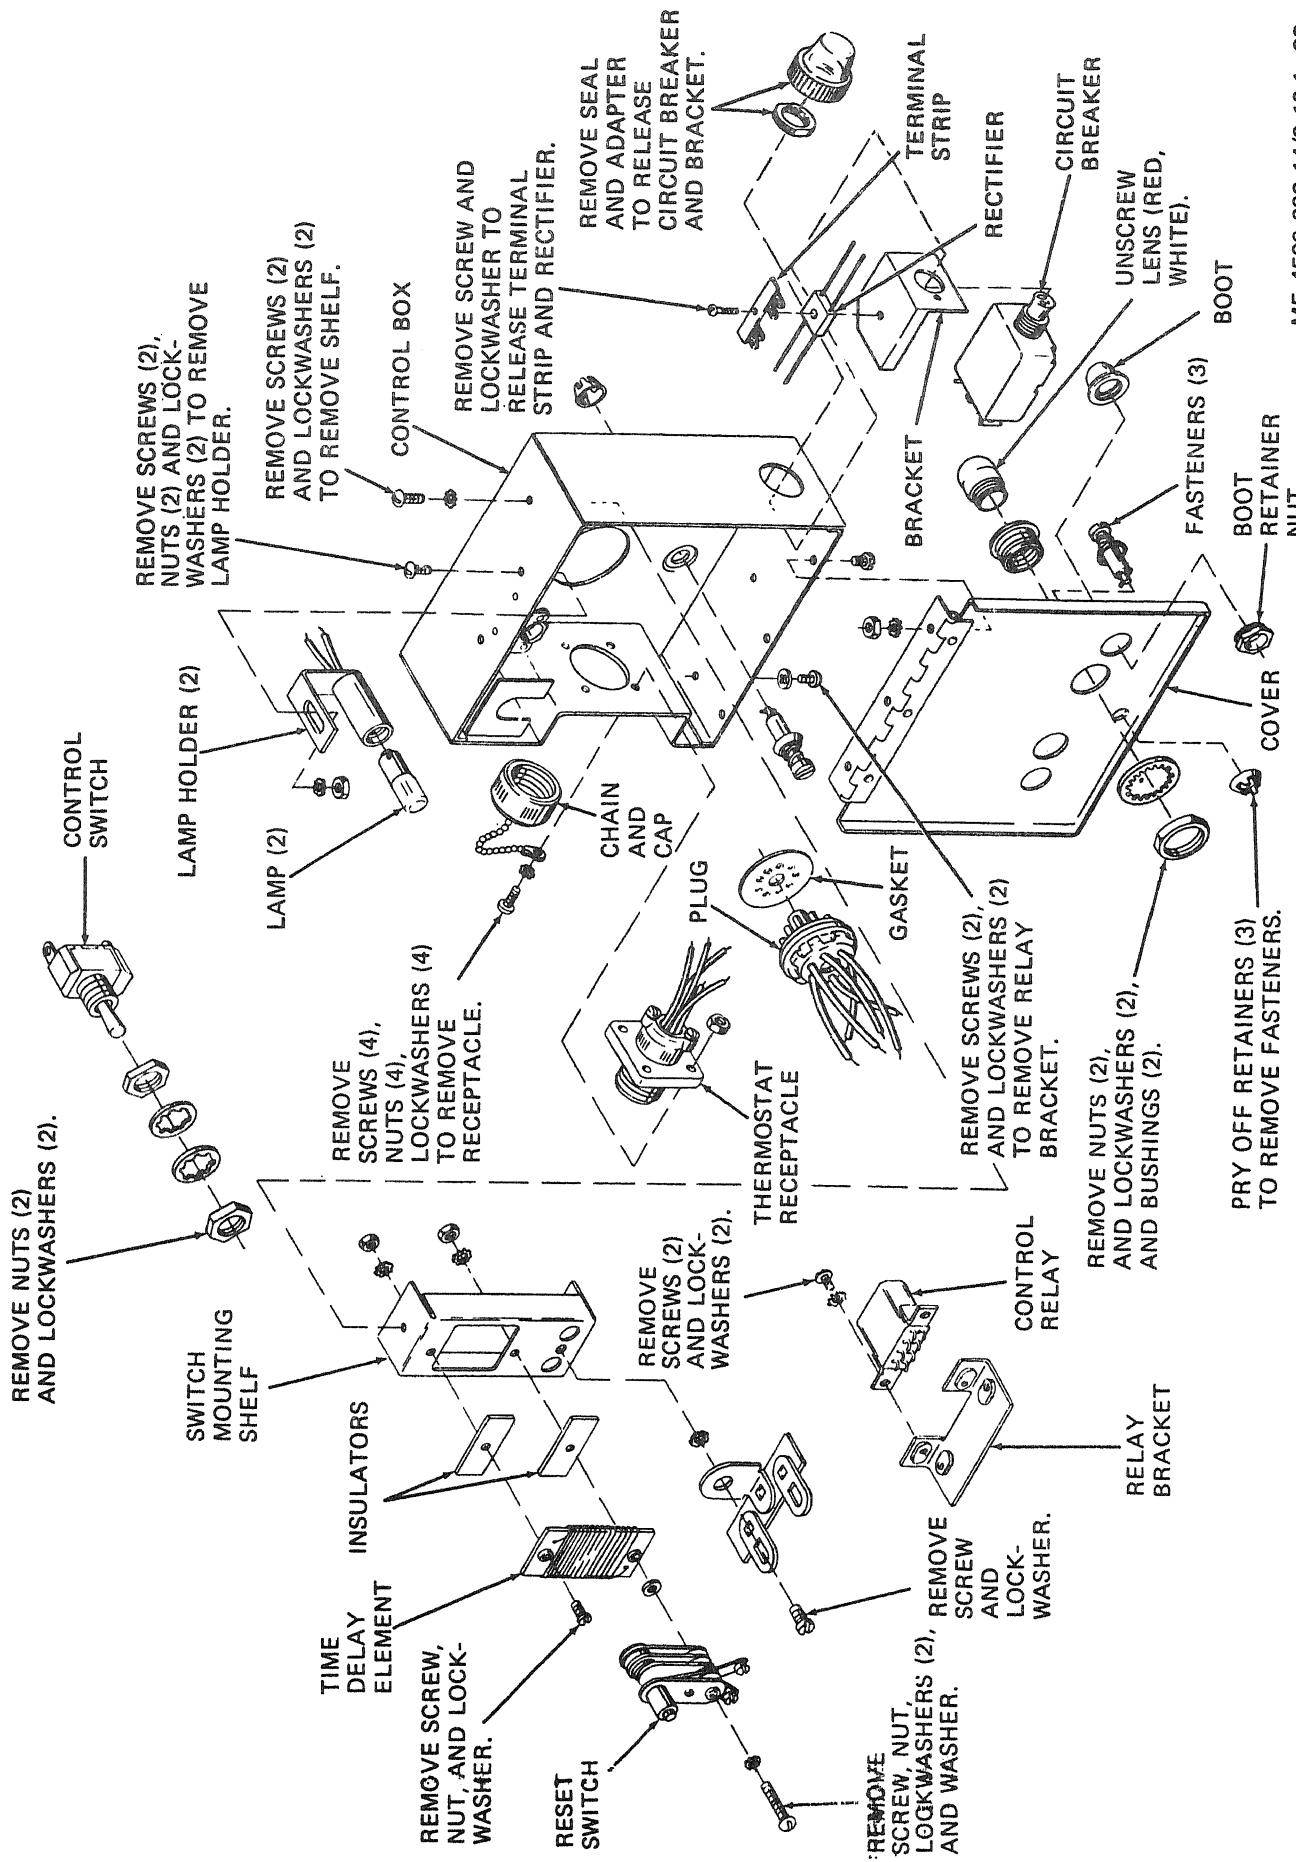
Control box, disassembly and reassembly (Model UH-68E).
